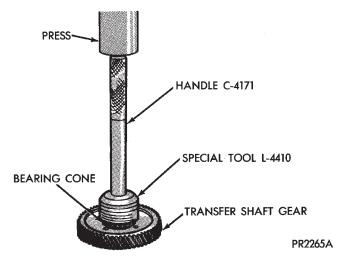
Install Transfer Shaft Gear Bearing Cone
